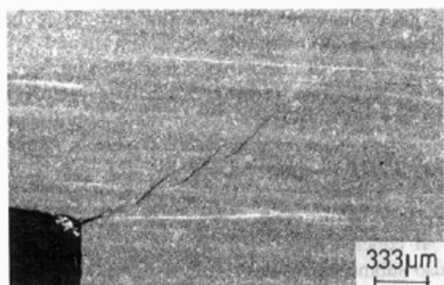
Row of cracks in the marked angle of the split ring groove in Fig. 16. Ground specimen.
